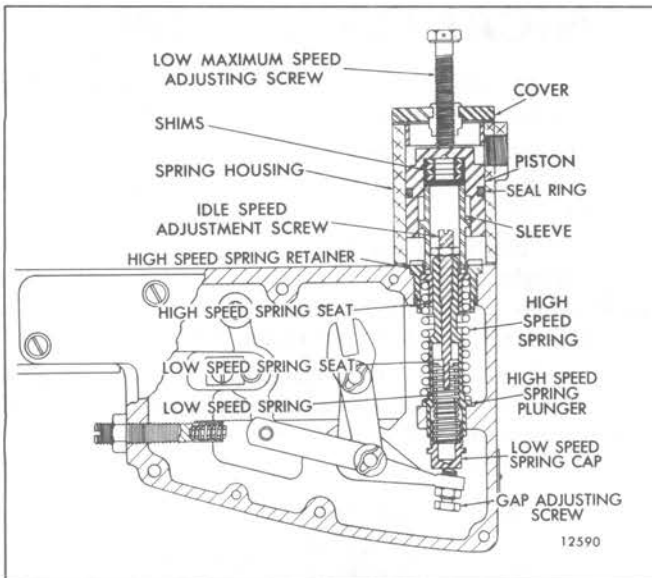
Cross Section of Dual Range Governor Spring Assembly
